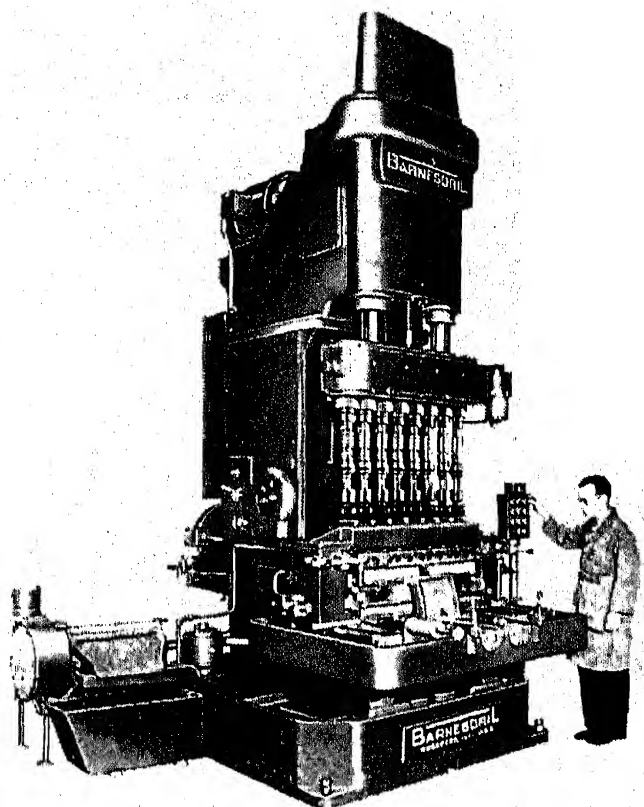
A vertical multiple spindle hydraulic honing machine equipped with eight hydraulically actuated honing tools. An eight cylinder engine block is held in a fixture during the honing operation. (Courtesy Barnes Drill Co.)
